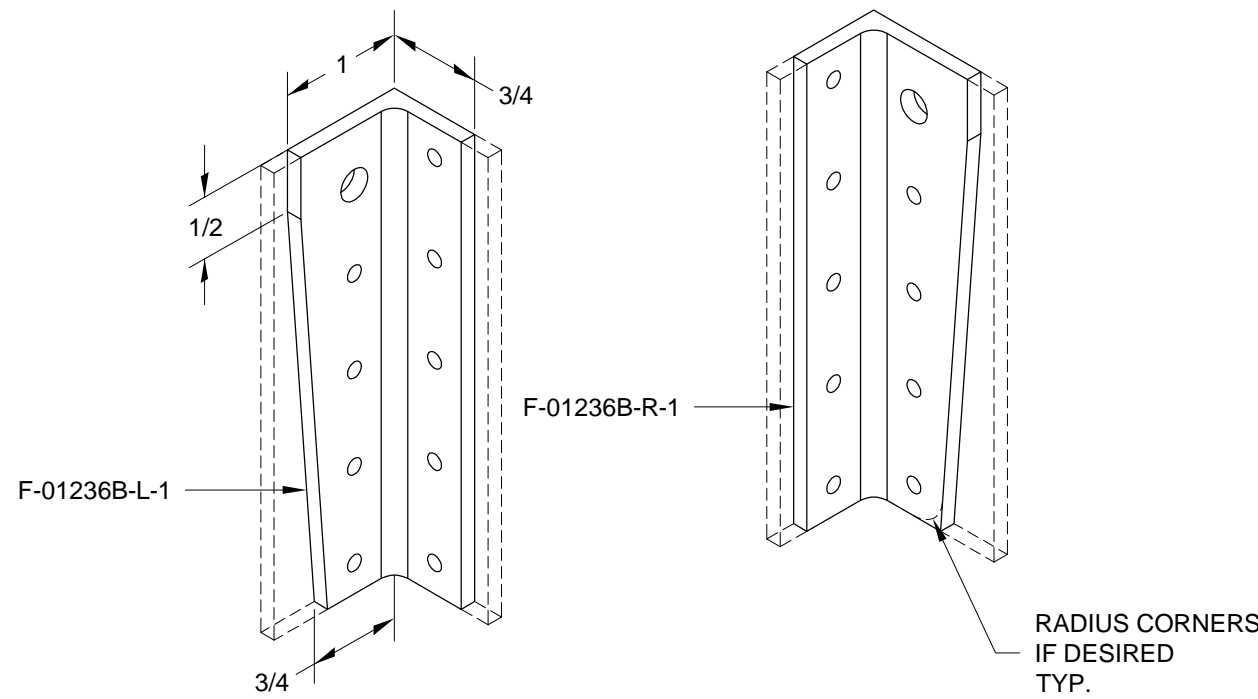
TRIMMING F-01236B-L-1 & -R-1
